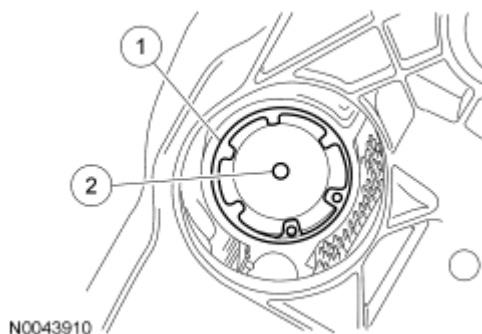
Identifying Snap Ring And Receiver Drier Plug
